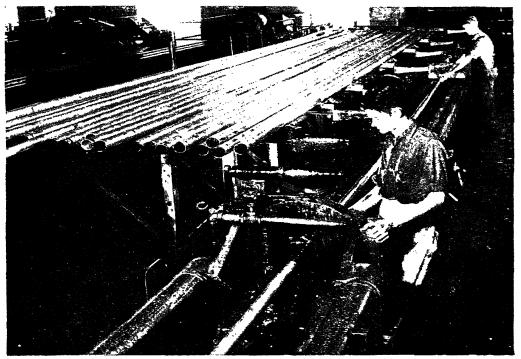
Forming aluminum tubing by means of extrusion on a drawbench. (Courtesy of Aluminum Co. of America.)
